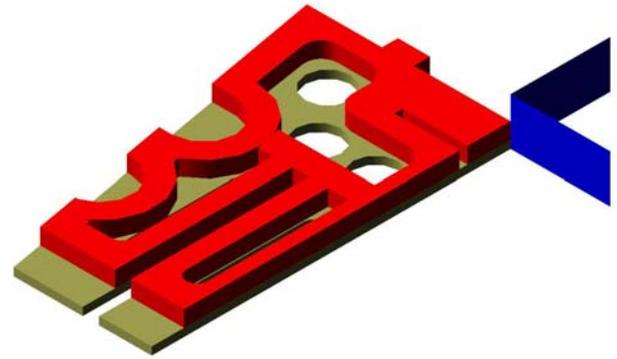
Assemble and glue tail mount frame: T1-T6 pieces. Glue frame to tail mount side as marked in balsa. Frame should square-up to the bottom and leading edge of the tail mount side.
